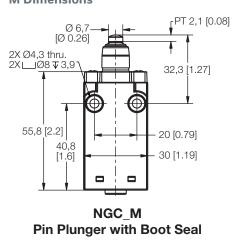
Panel-Mount PIn Plunger N Dimensions
